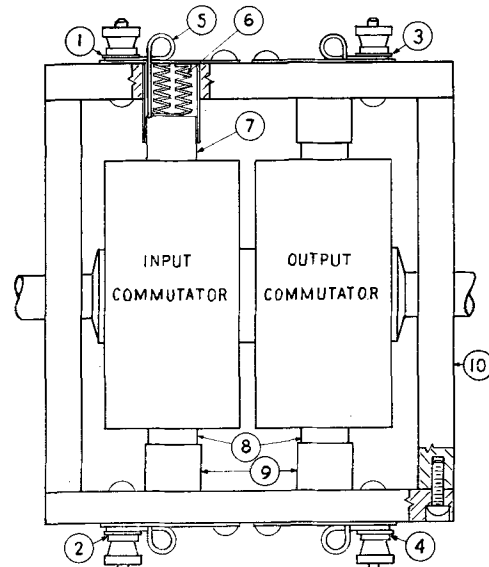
Brush holder assembly. 1—D.C. plus input; 2—d.c. minus input; 3—a.c. to anode; 4—a.c. to cathode; 5—flexible lead to brush; 6—spring; 7—brush; 8—brushes; 9—holders; 10—Bakelite frame.
